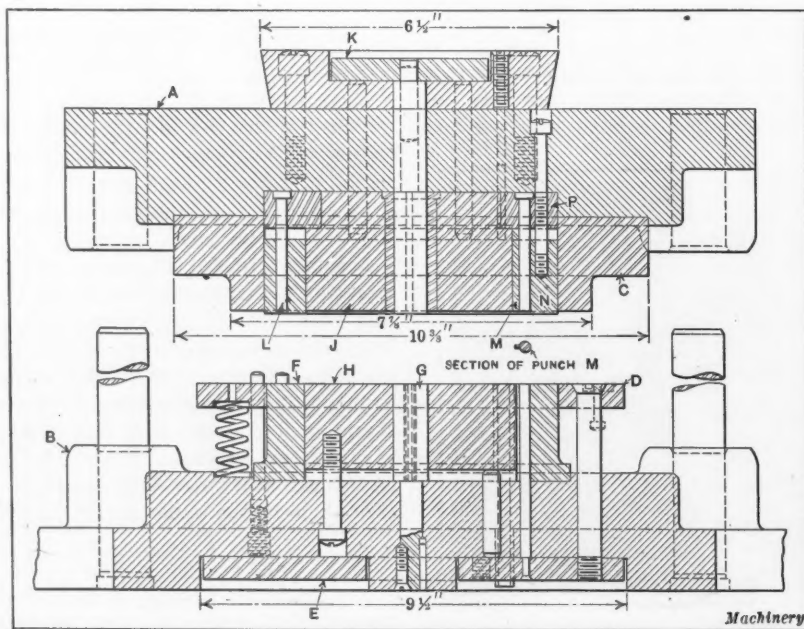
Sectional View of the Sub-press Die shown in Fig. 2
